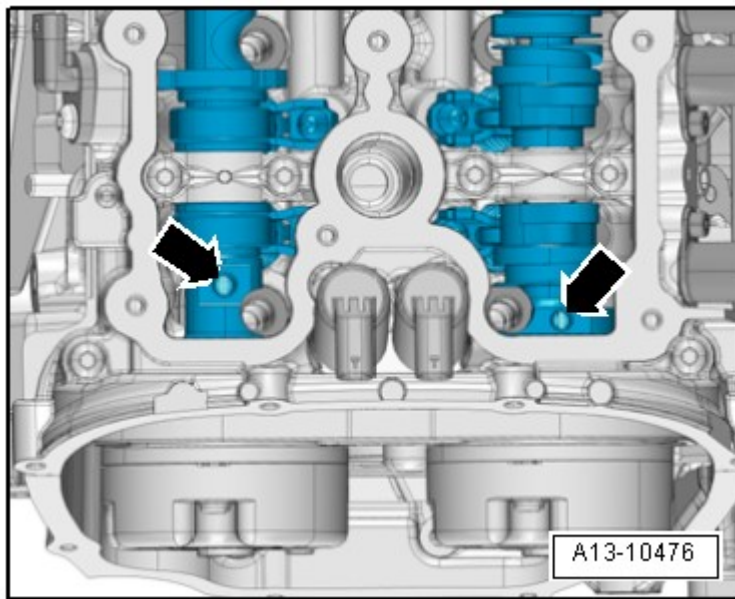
Rotating Camshafts Until Threaded Holes -Arrows- Face Upward
